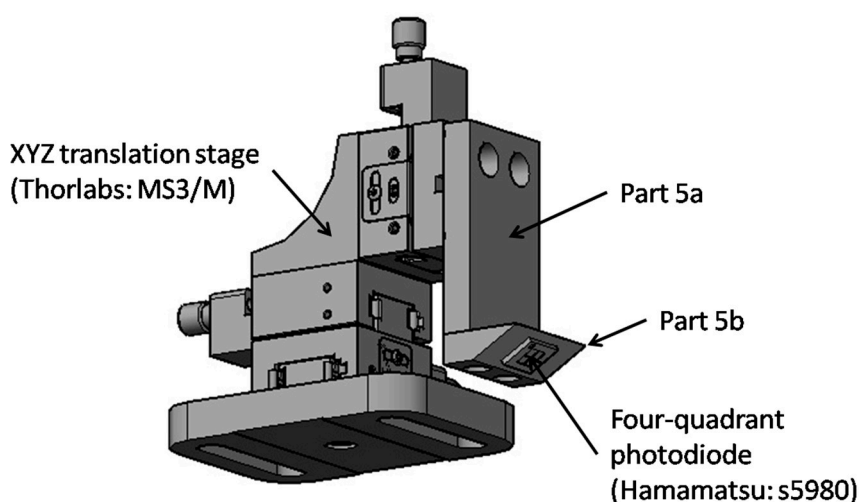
The assembly detail for the section consisting of a photodiode module. Custom part 5a and part 5b are used in this section. The purpose of the two custom parts is to hold the photodiode module. The photodiode module is fixed to part 5b using double sided adhesive tape. Note that for standard practice, the photodiode module should be soldered to small printed circuit board (with wires connected/soldered) prior to this fixing process. The end-mounted adjustment screws (X, Y and Z-axes) of the translation stage are used to align the reflected laser spot (from the back of an AFM cantilever) to the center of the photodiode module.
